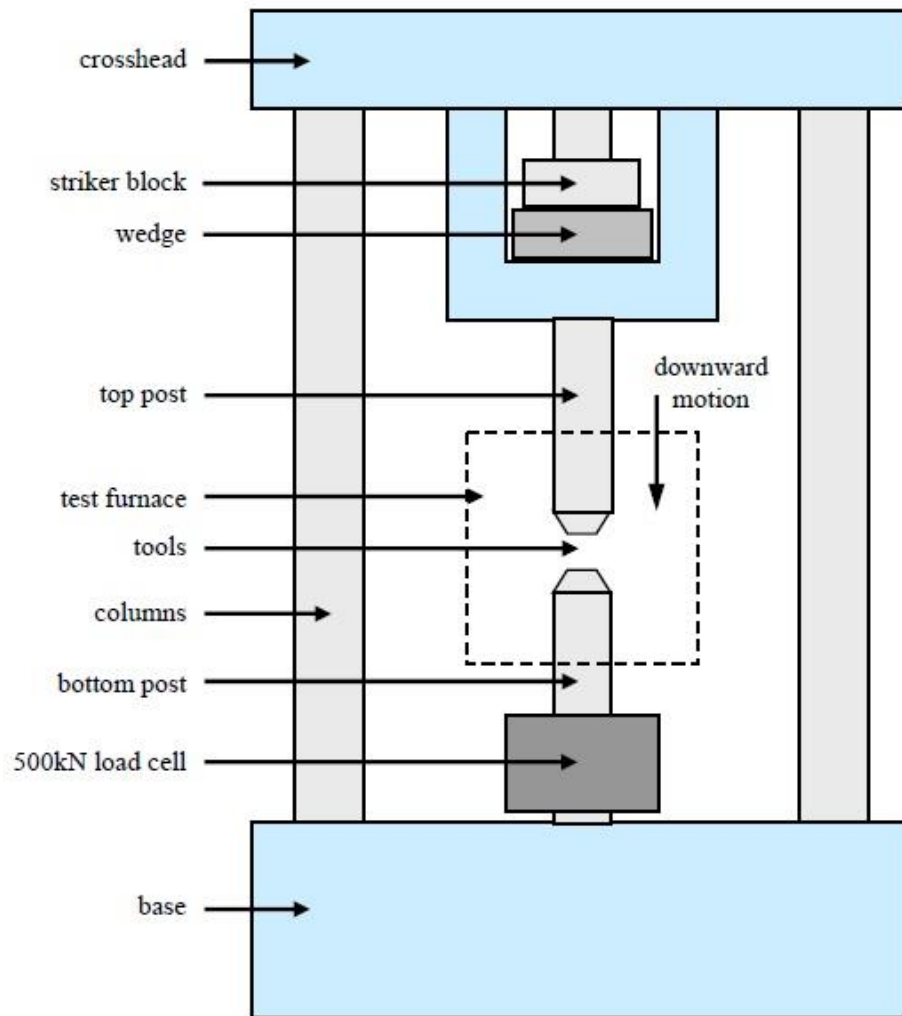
Schematic of the TMC machine illustrating the relevant components^[132].
